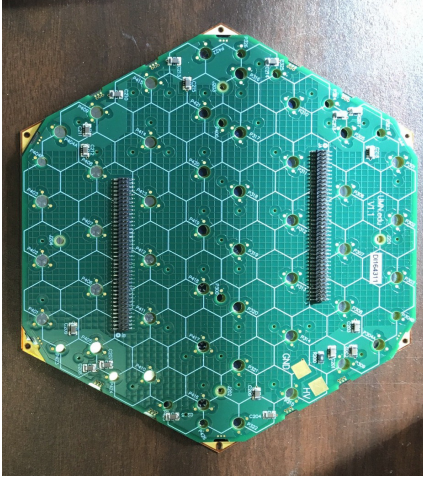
A photo of the assembled sensor module showing the PCB with connectors and holes for wire bonds. The Kapton layer is visible at the corners, where there are also holes through the module to enable it to be attached to a support (cooling) plate.
